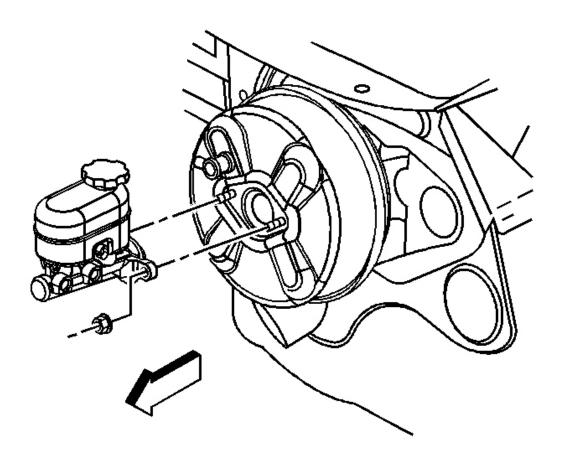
Master Cylinder To Booster View Courtesy of GENERAL MOTORS CORP.
